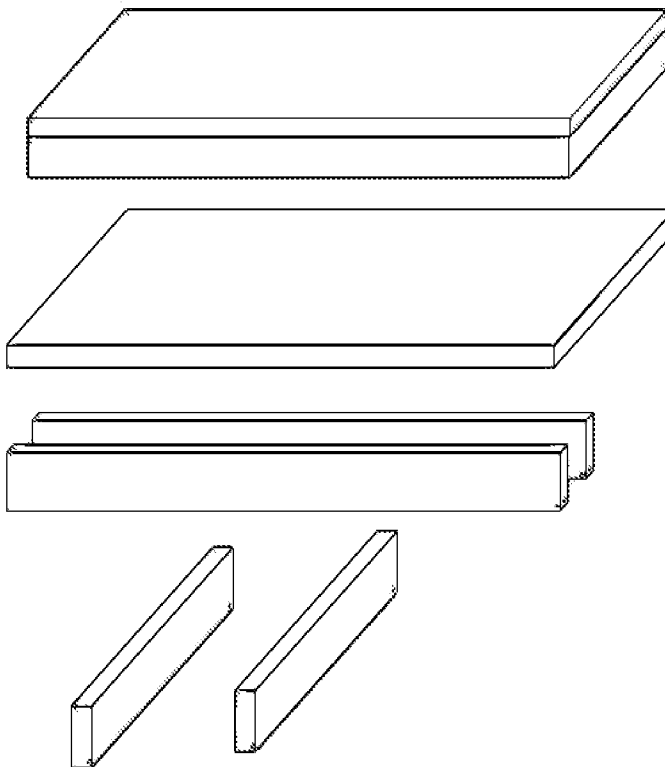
7 Zone Viscoflex Ventilated Mattress Core with Side & End Support Rails
